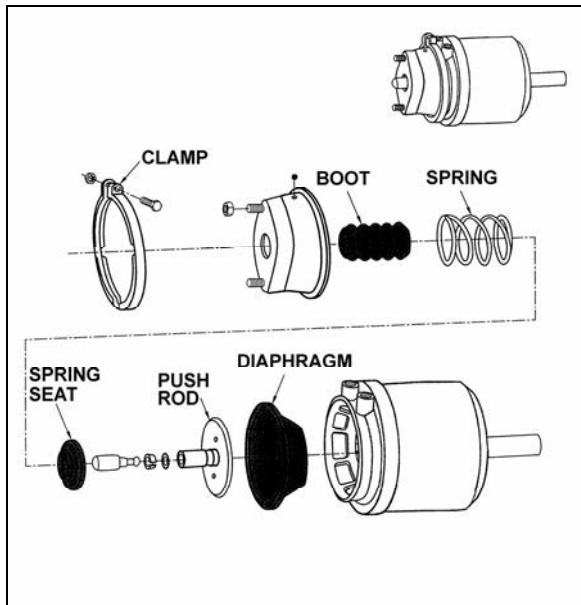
TAG AXLE BRAKE AIR CHAMBER 12126
